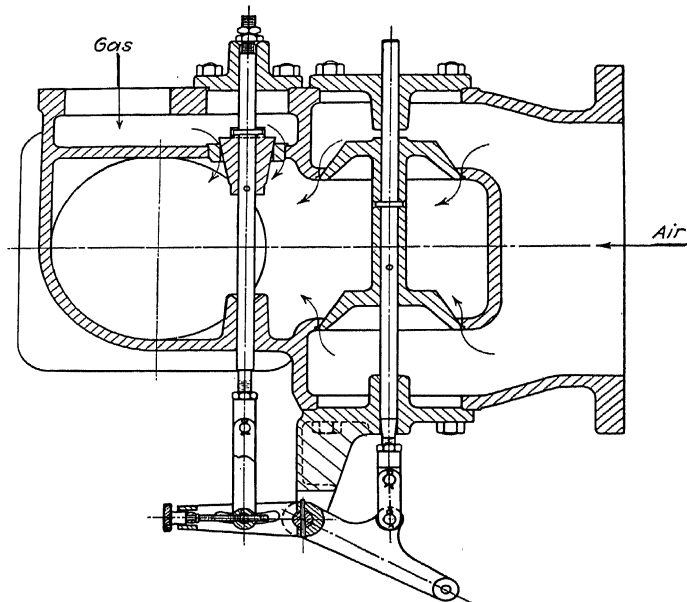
Section through gas mixing valve used on Worthington gas engine. (Courtesy of Worthington Pump and Machinery Corporation.)
